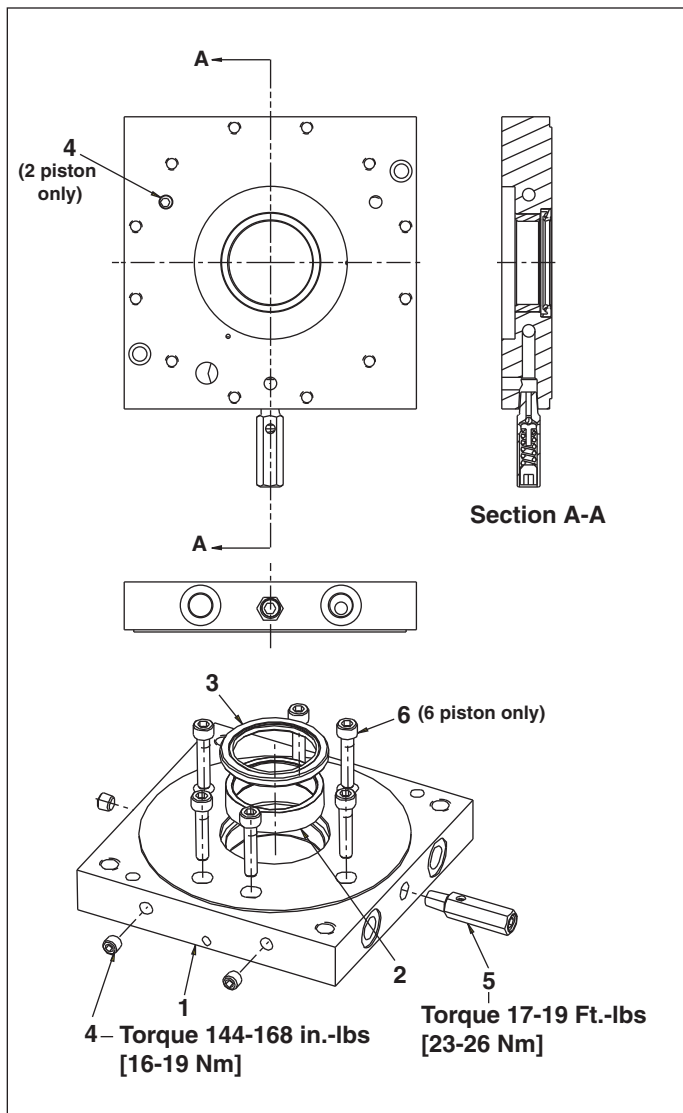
B, Steel Top Plate Assembly for Direct Drive Motor (Replaces original aluminum top plate assembly - ZE, ZG and ZW Series - Date Codes A, B and C)
